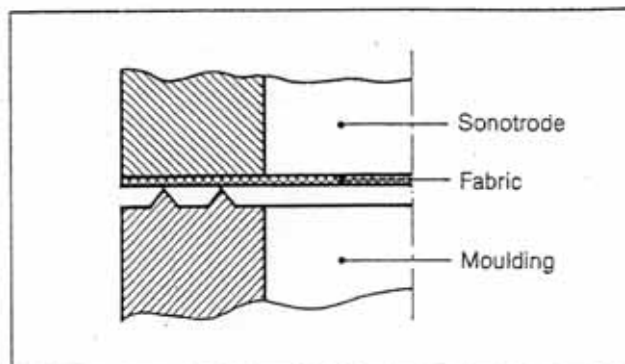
Arrangement for ultrasonic welding of fabrics and mouldings.
